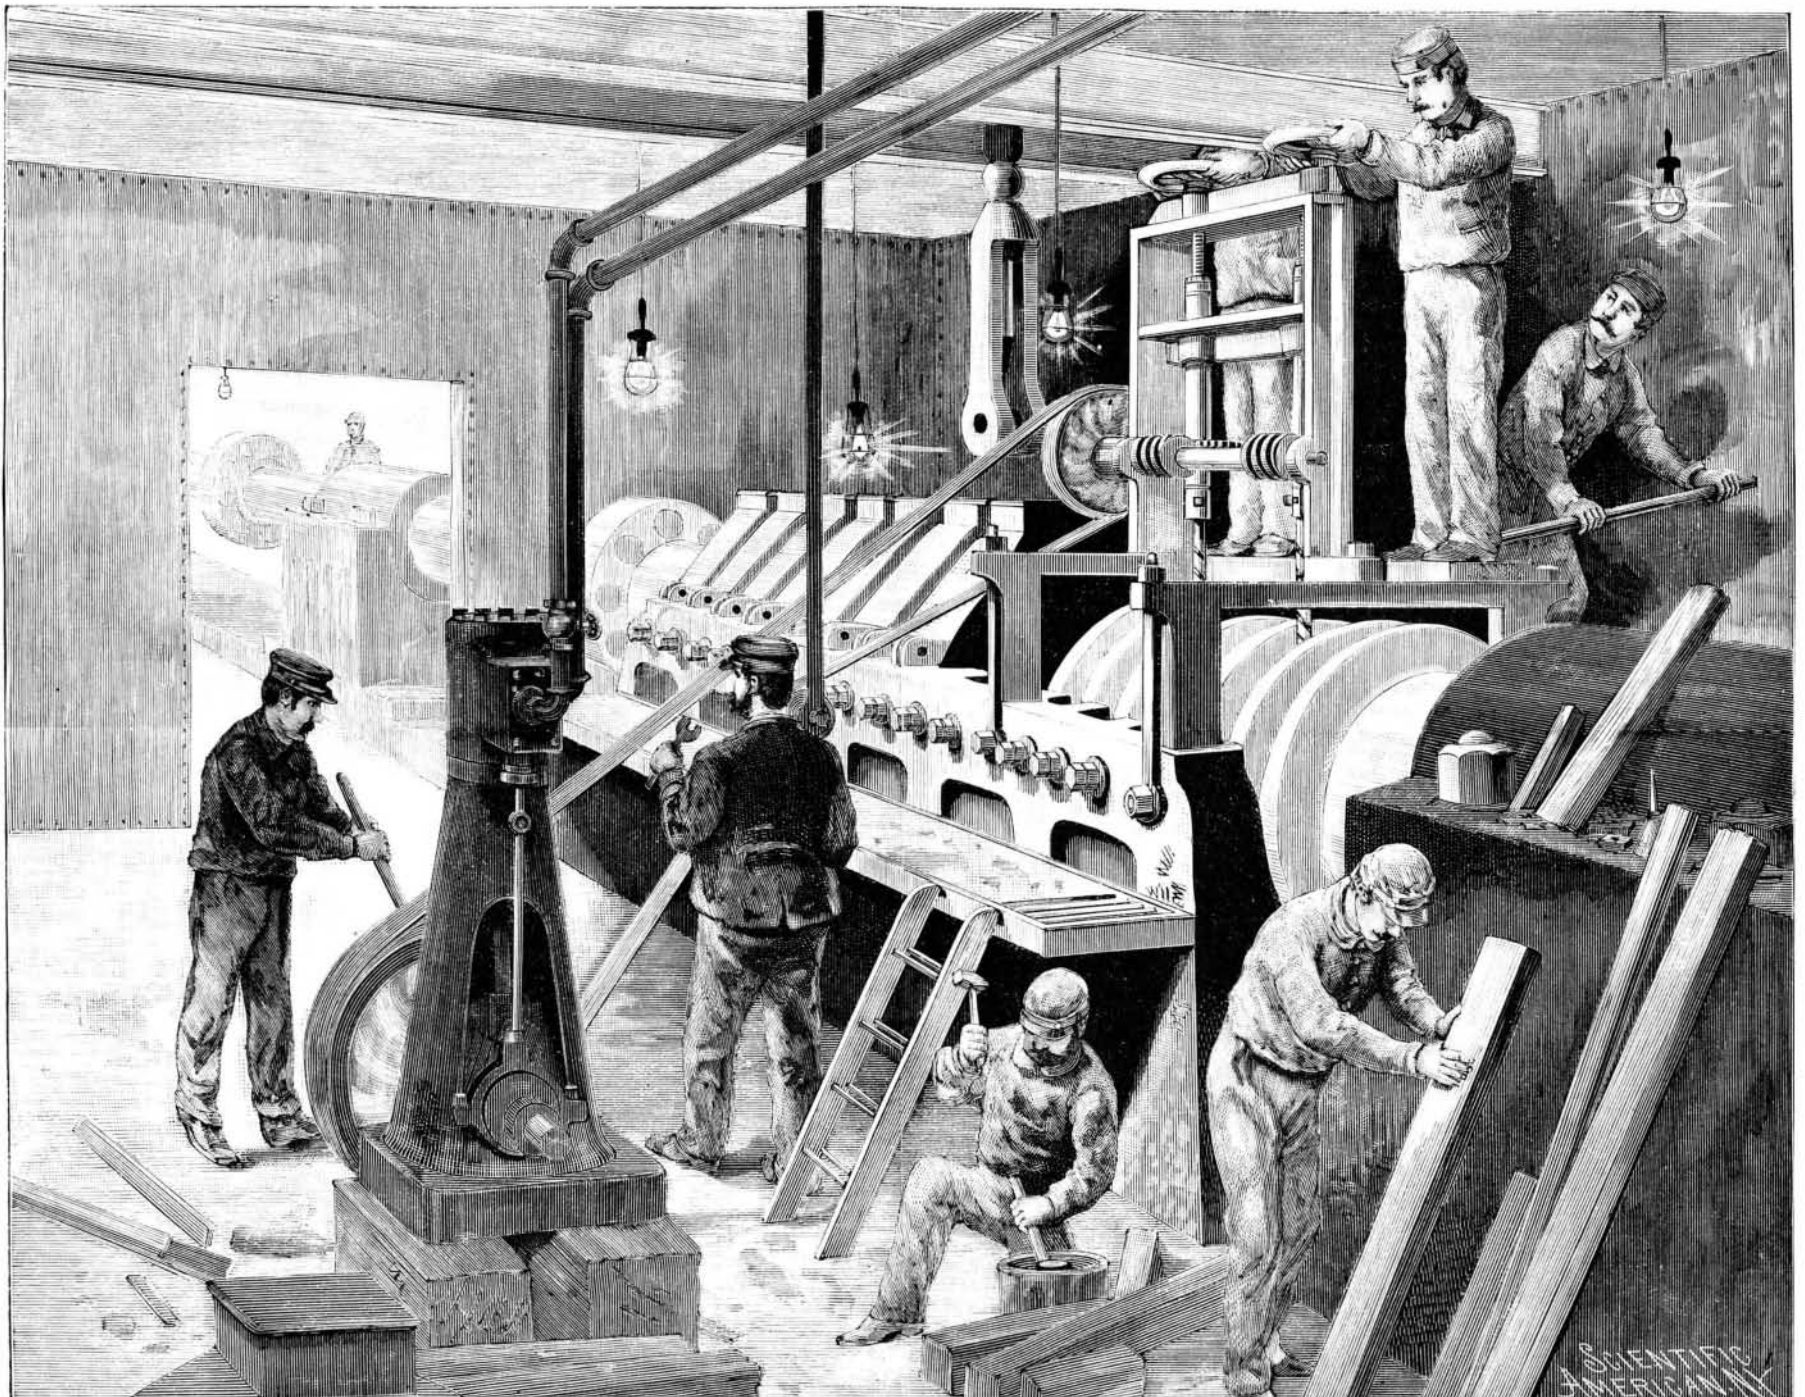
THE CUNARD STEAMER UMBRIA—THE SPECIAL DUPLEX DRILLS FOR CUTTING OUT THE BROKEN SECTION OF THE MAIN SHAFT.—[See page 56.]
